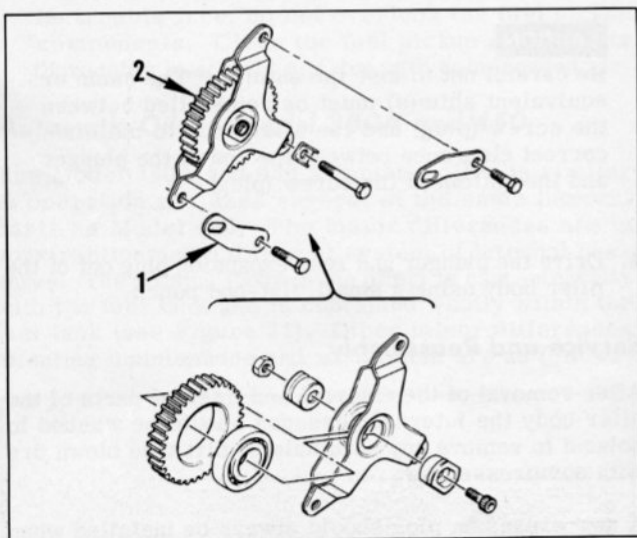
(1) Yoke Strap, (2) Yoke Assembly
